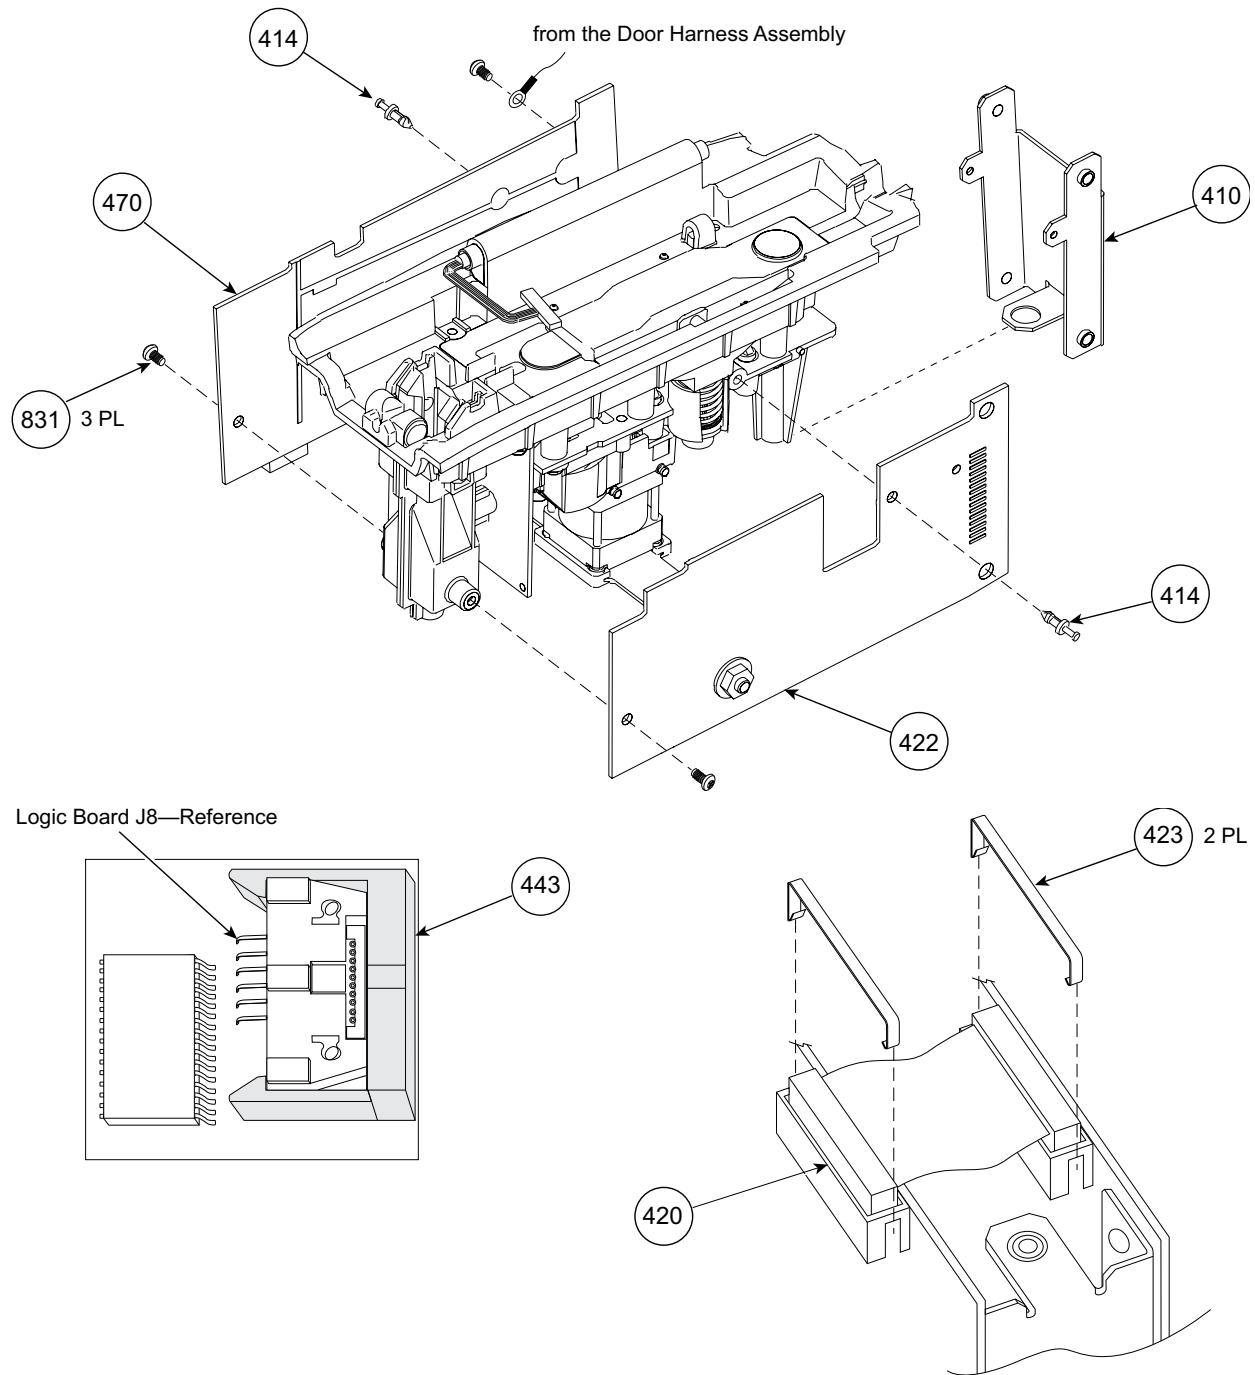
Model 8100 - Logic Board and Motor Controller Board Assembly
